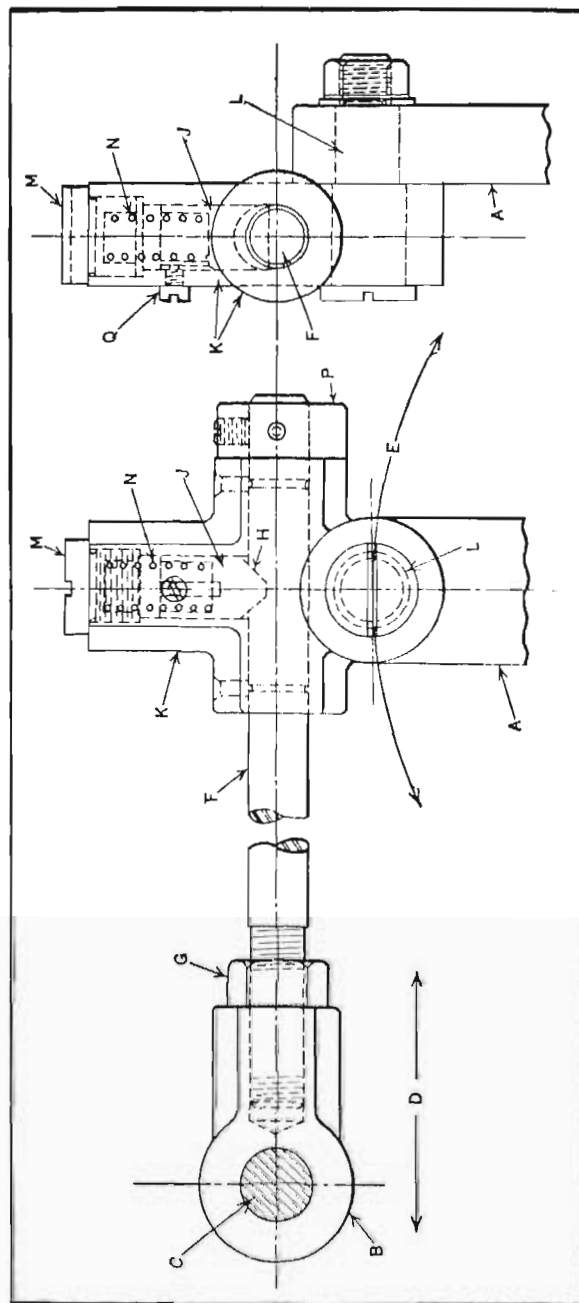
Release Mechanism for Reciprocating Lever Designed to Prevent Breakage Due to Overloading or Jamming of Machine Parts
